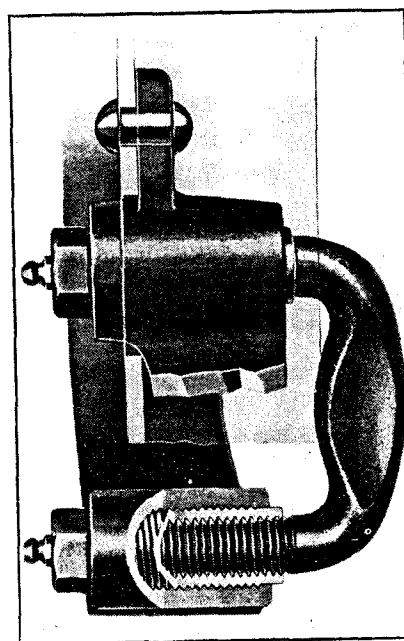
Cut-away view of LaSalle rear spring rear shackle. The shackle is removed by screwing out the threaded bushings
